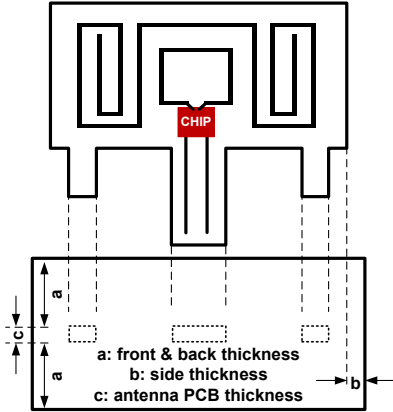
Front view of the antenna and top view of the bottom plate of the mold.
